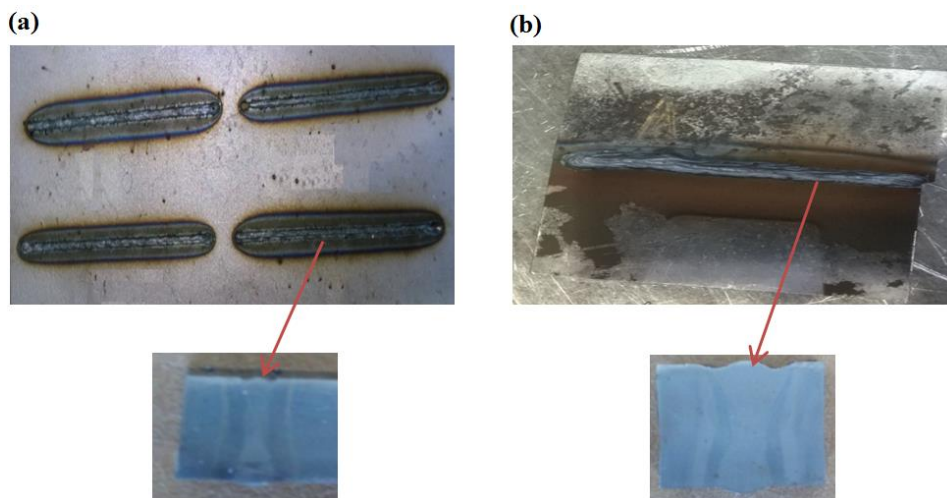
(a) Macrostructure of bead on plate weldings of S960 steel, (b) butt welding of S700 steel
